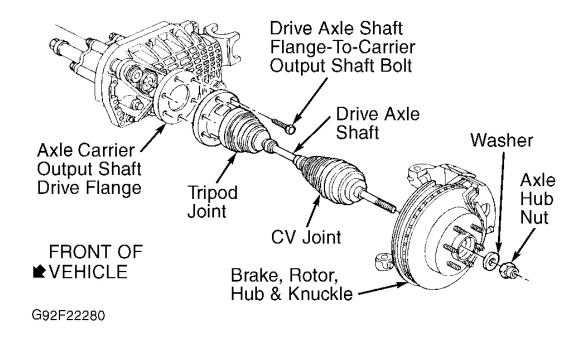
Left Drive Axle Shaft With Tripod & CV Joints Courtesy of GENERAL MOTORS CORP.
